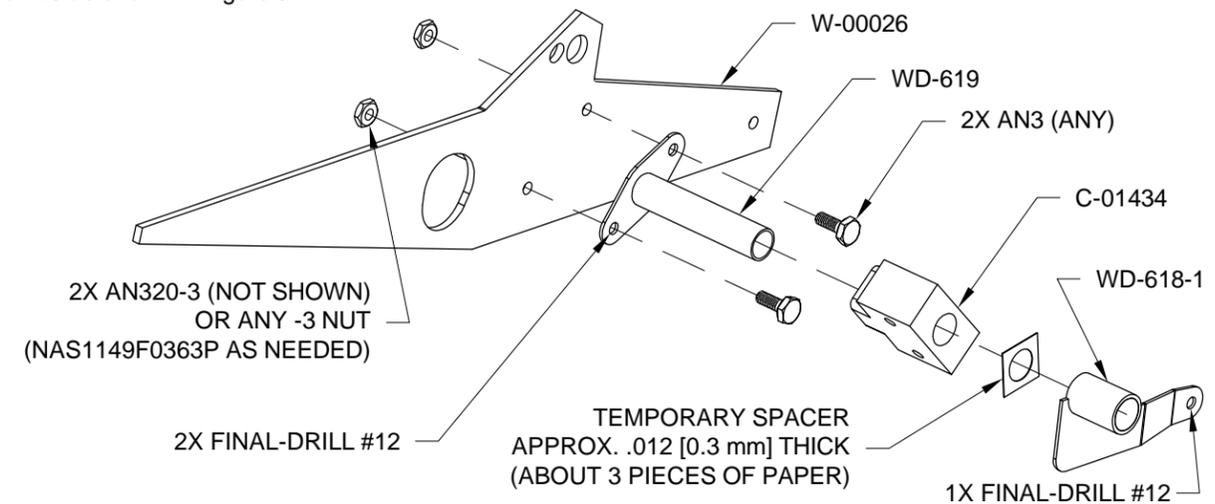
RELEASE MECHANISM - EXPLODED VIEW
